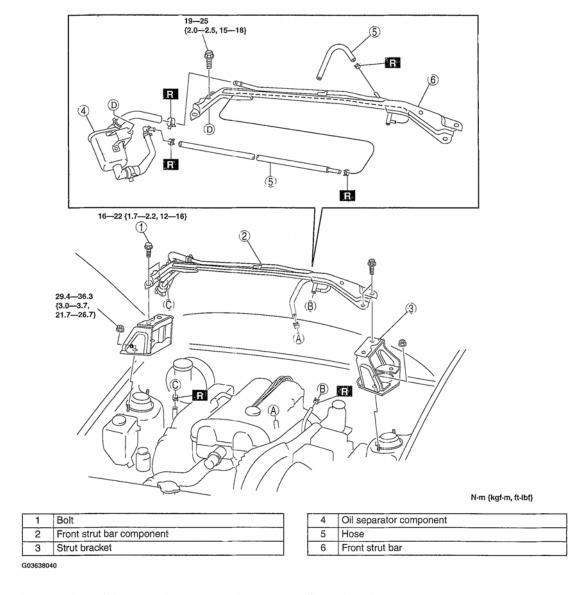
View Of Front Strut Bar & Torque Specifications Courtesy of MAZDA MOTORS CORP.
